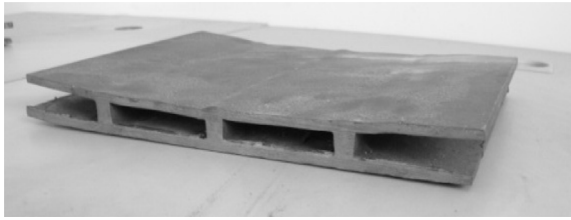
Actual product photo of explosive welding hollow structural component.
